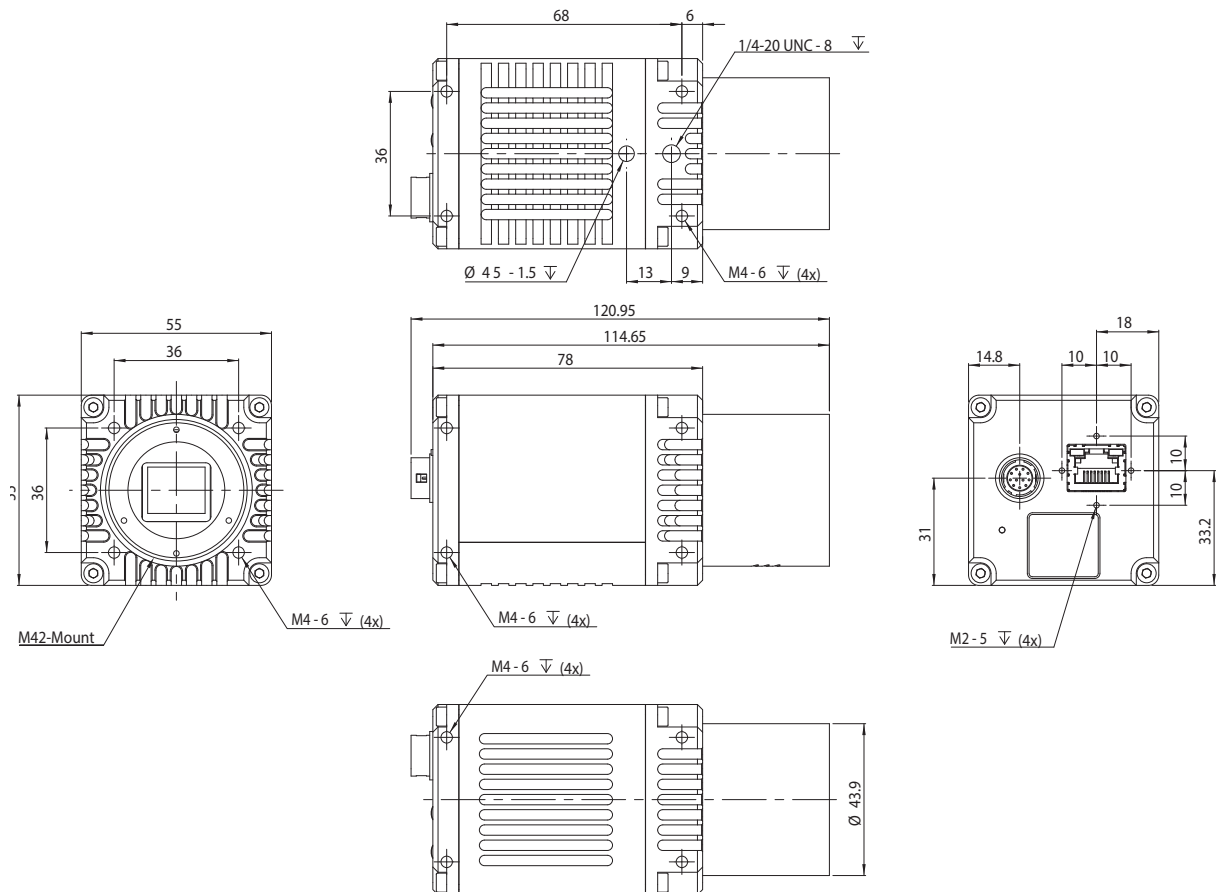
Dimensions Goldeye G-032 SWIR with M42-Mount lens adapter
